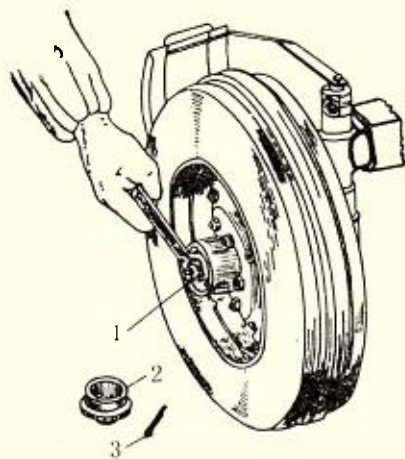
2 Adjusting the axial play of front hub bearing
